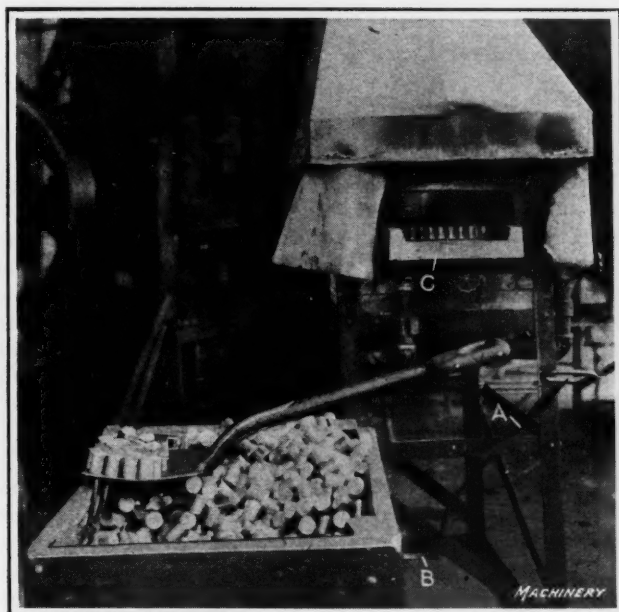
Arrangement of Oil-fired Furnace in which the Blanks are heated preparatory to forging
